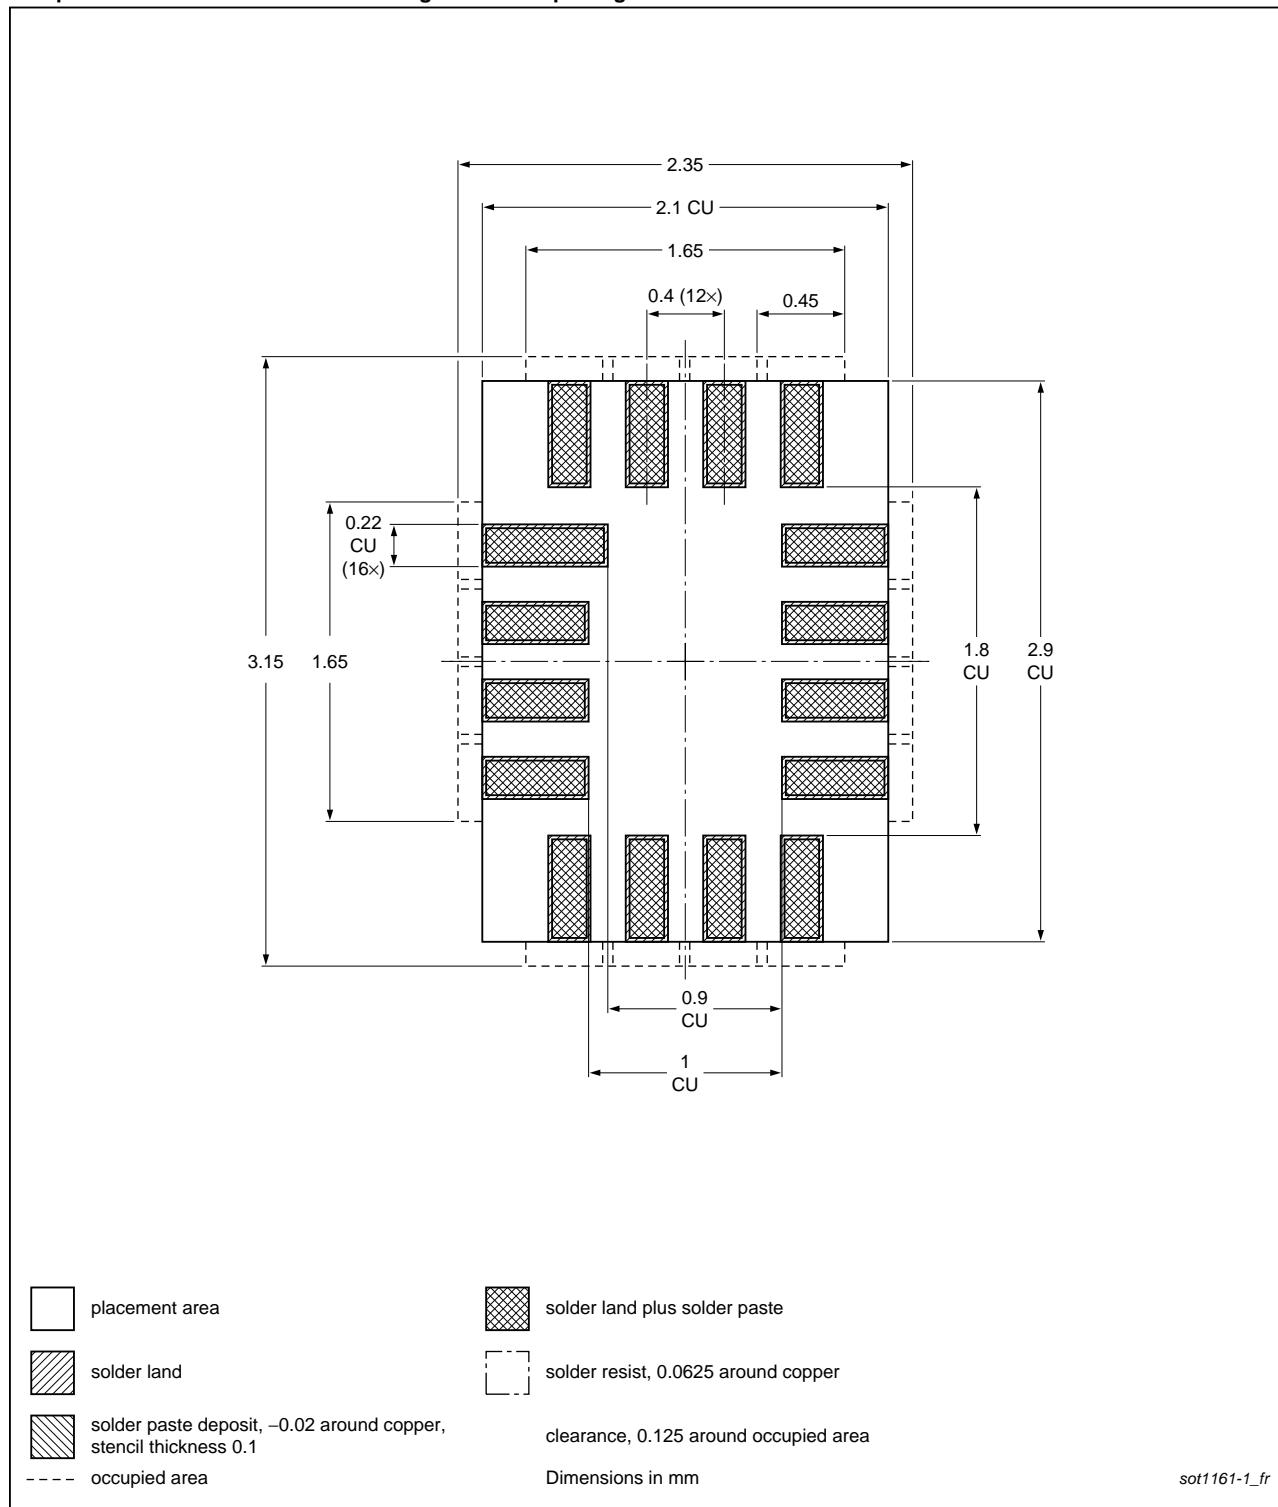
PCB footprint for SOT1161-1 (XQFN16); reflow soldering
